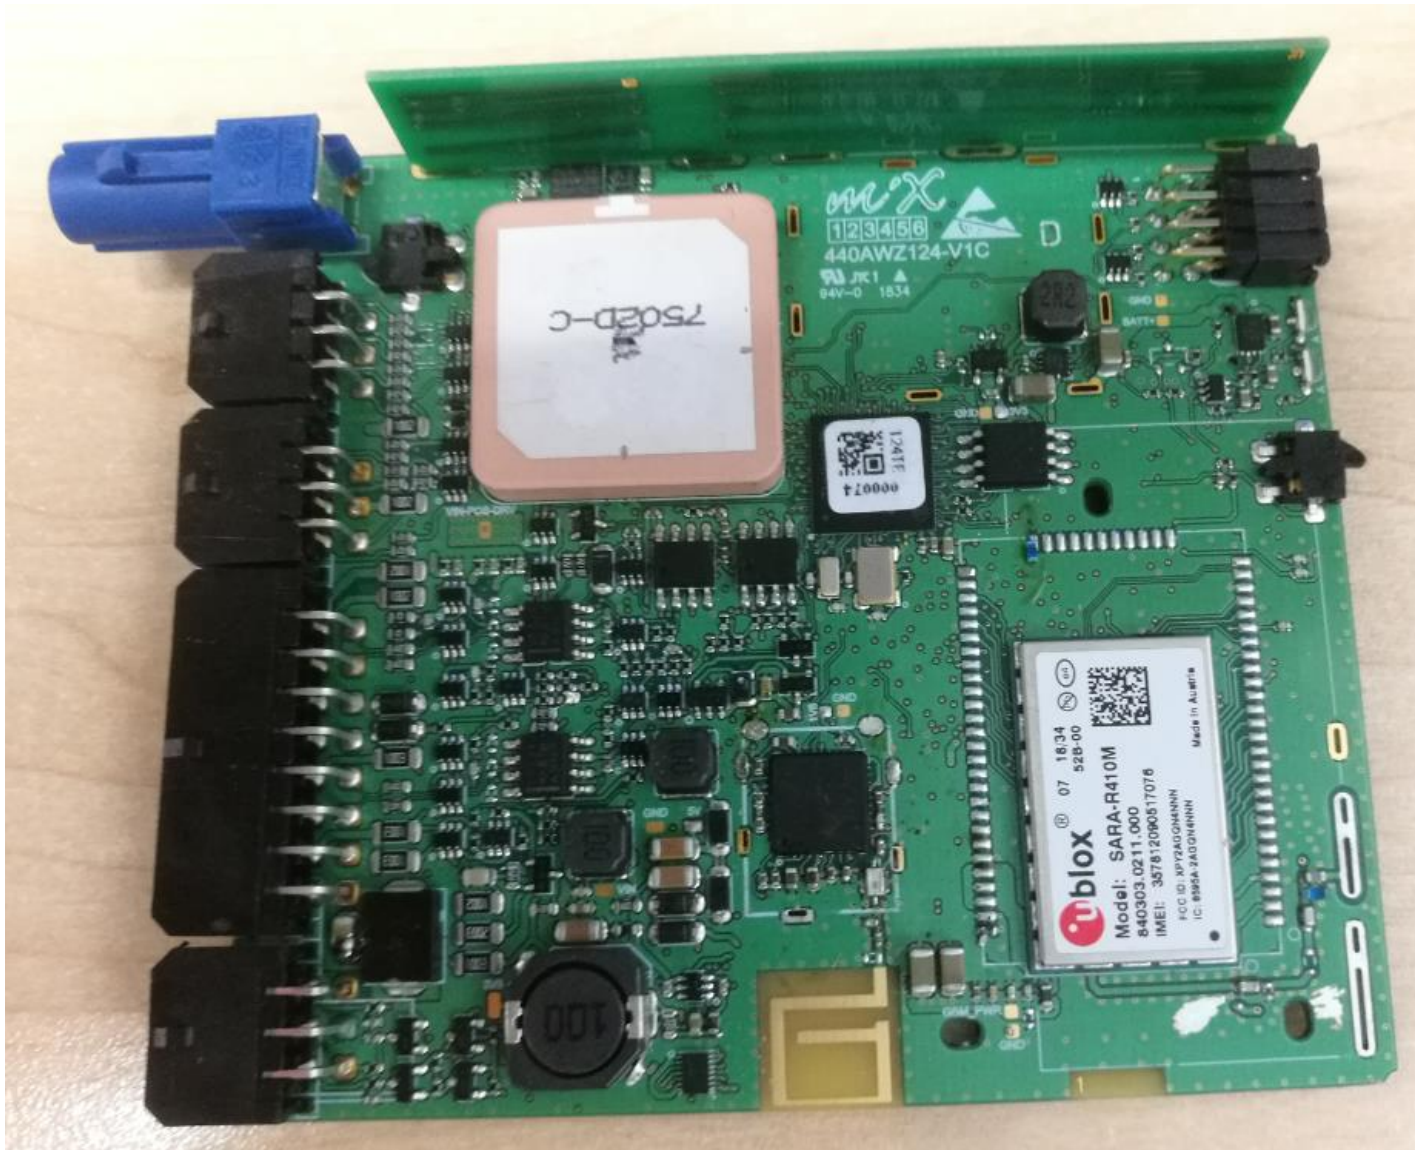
View of Main PCB on Carrier (top view) (without shields)
